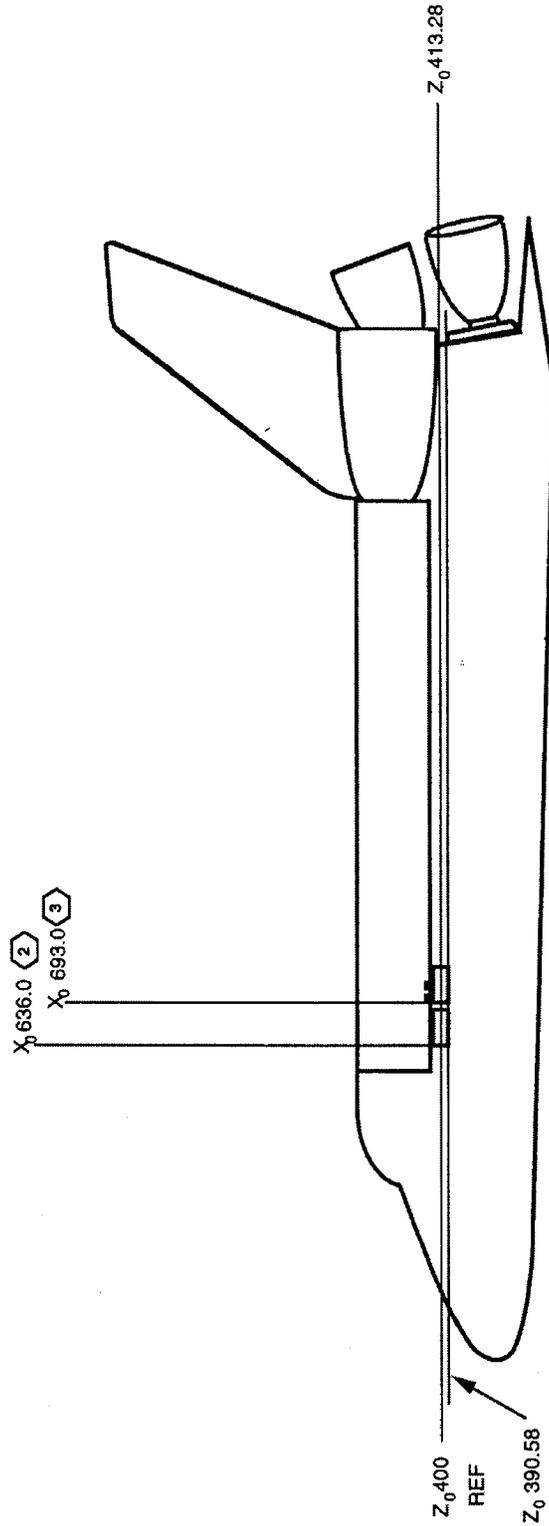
HITCHHIKER-S AVAILABLE SIDEWALL MOUNTING LOCATIONS
